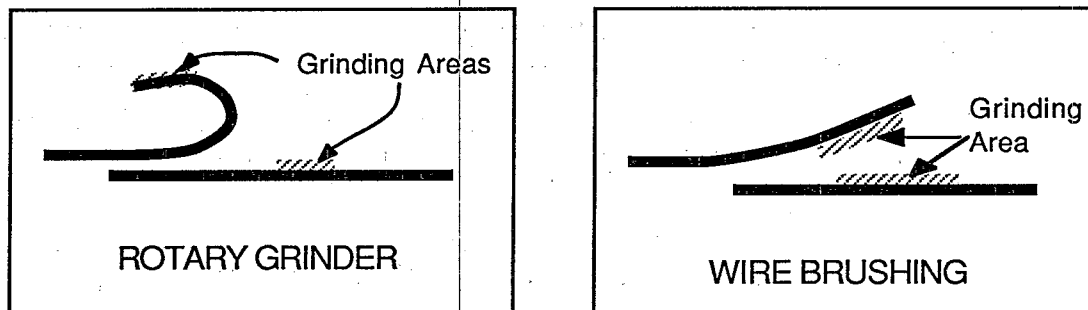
Grinding Locations and Method Used in the Preparation of Flat Extrusion Seams
